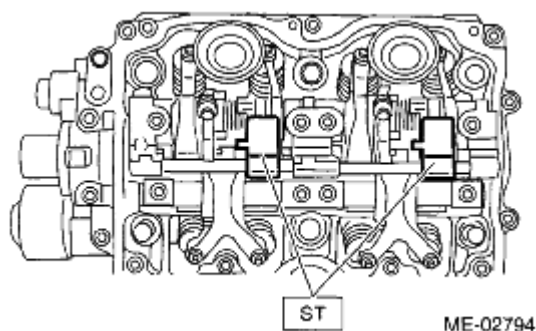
Identifying ST (18354AA000) Valve Rocker Holder
